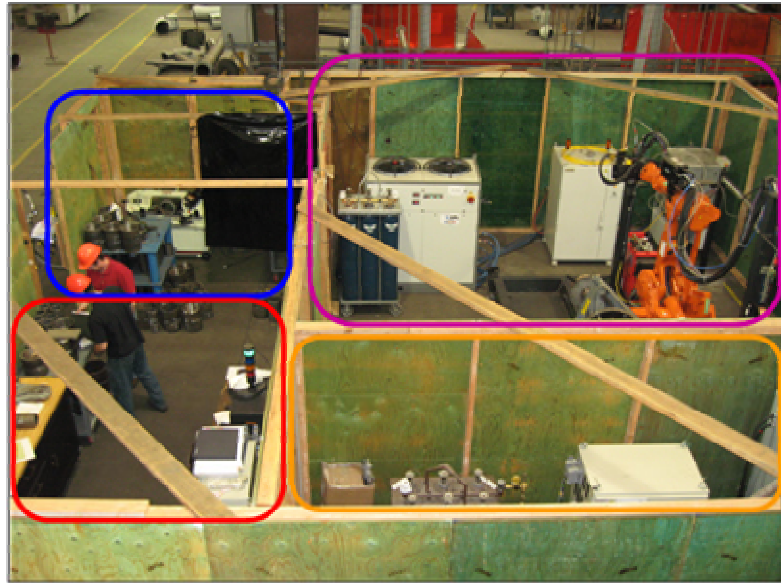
Bird's eye view of the hybrid pipe welding system installed in NASSCO's pipe shop.
